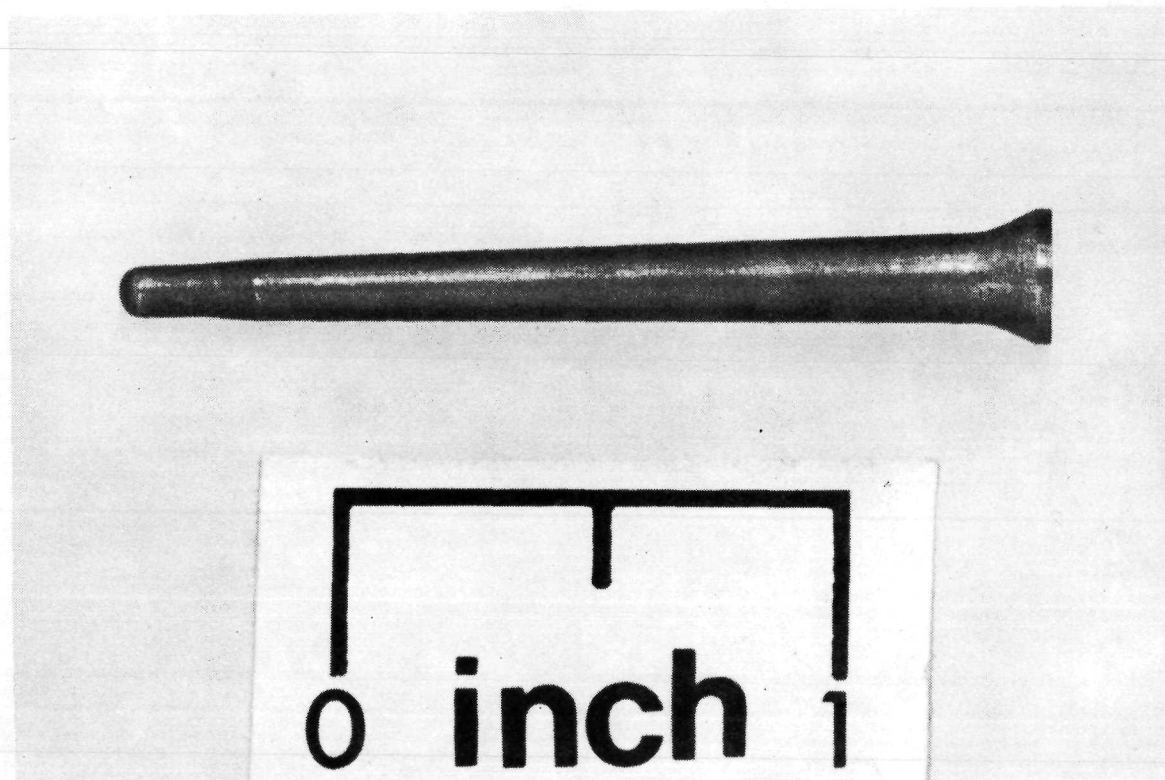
, MANDREL AND VAPOR DEPOSITED PARTS FOR P/N 232634
